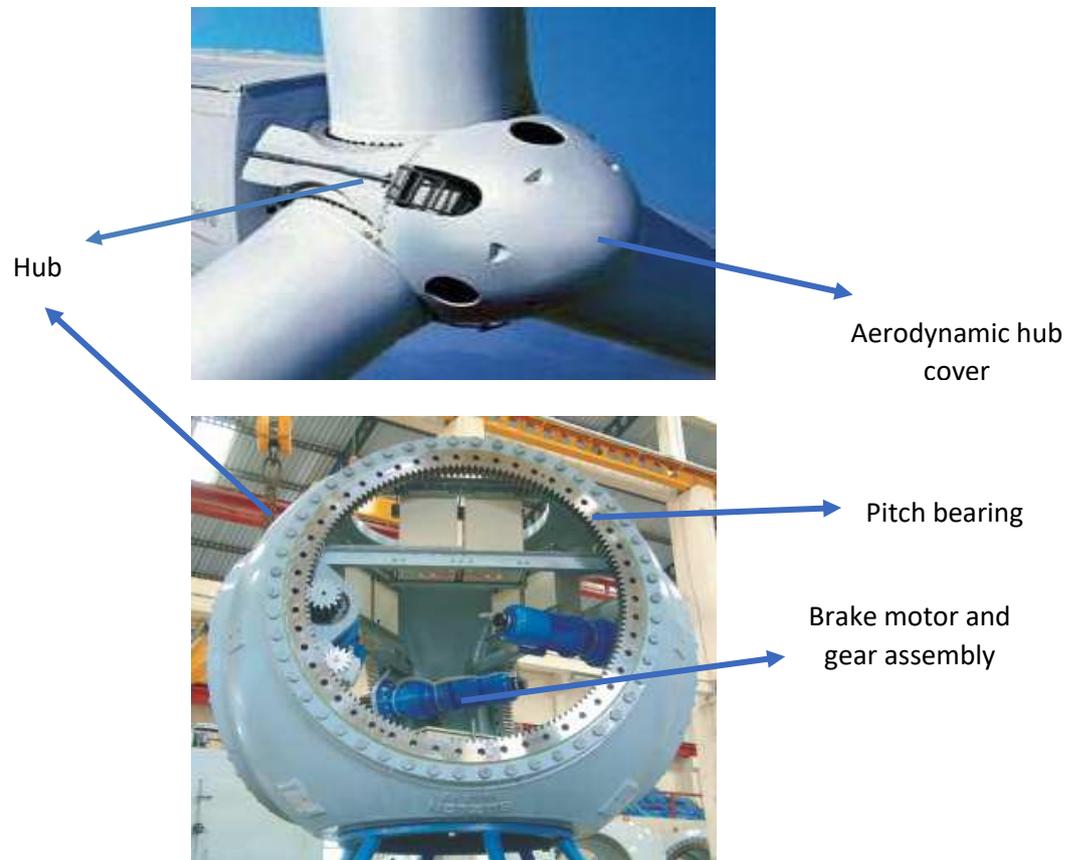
Top: Aerodynamic hub assembly including the hub cover; Bottom: hub assembly including, pitch bearing, brake motor and gear assembly.
